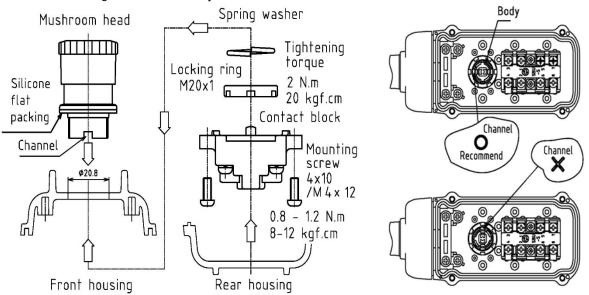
Cross-section and Top View of E-Stop Switch Installation
